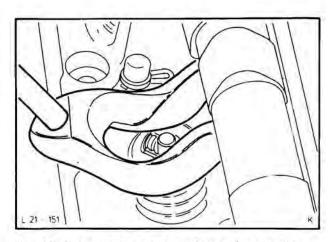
Fitting of valve springs, retainers and collets, with Special Tool 21–005
